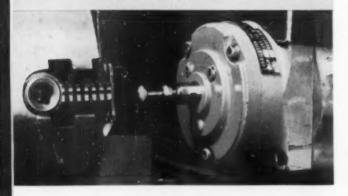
Precision bearings are produced using small wheels at high spindle speeds.
